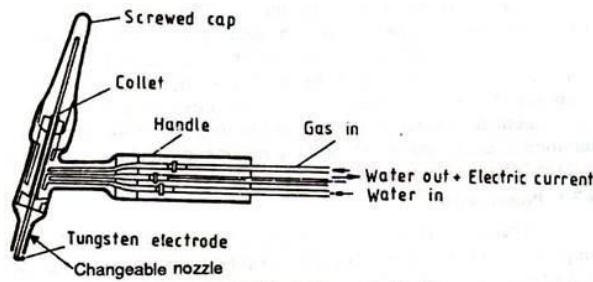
Water cooled GTAW torch for manual welding [43][150]
